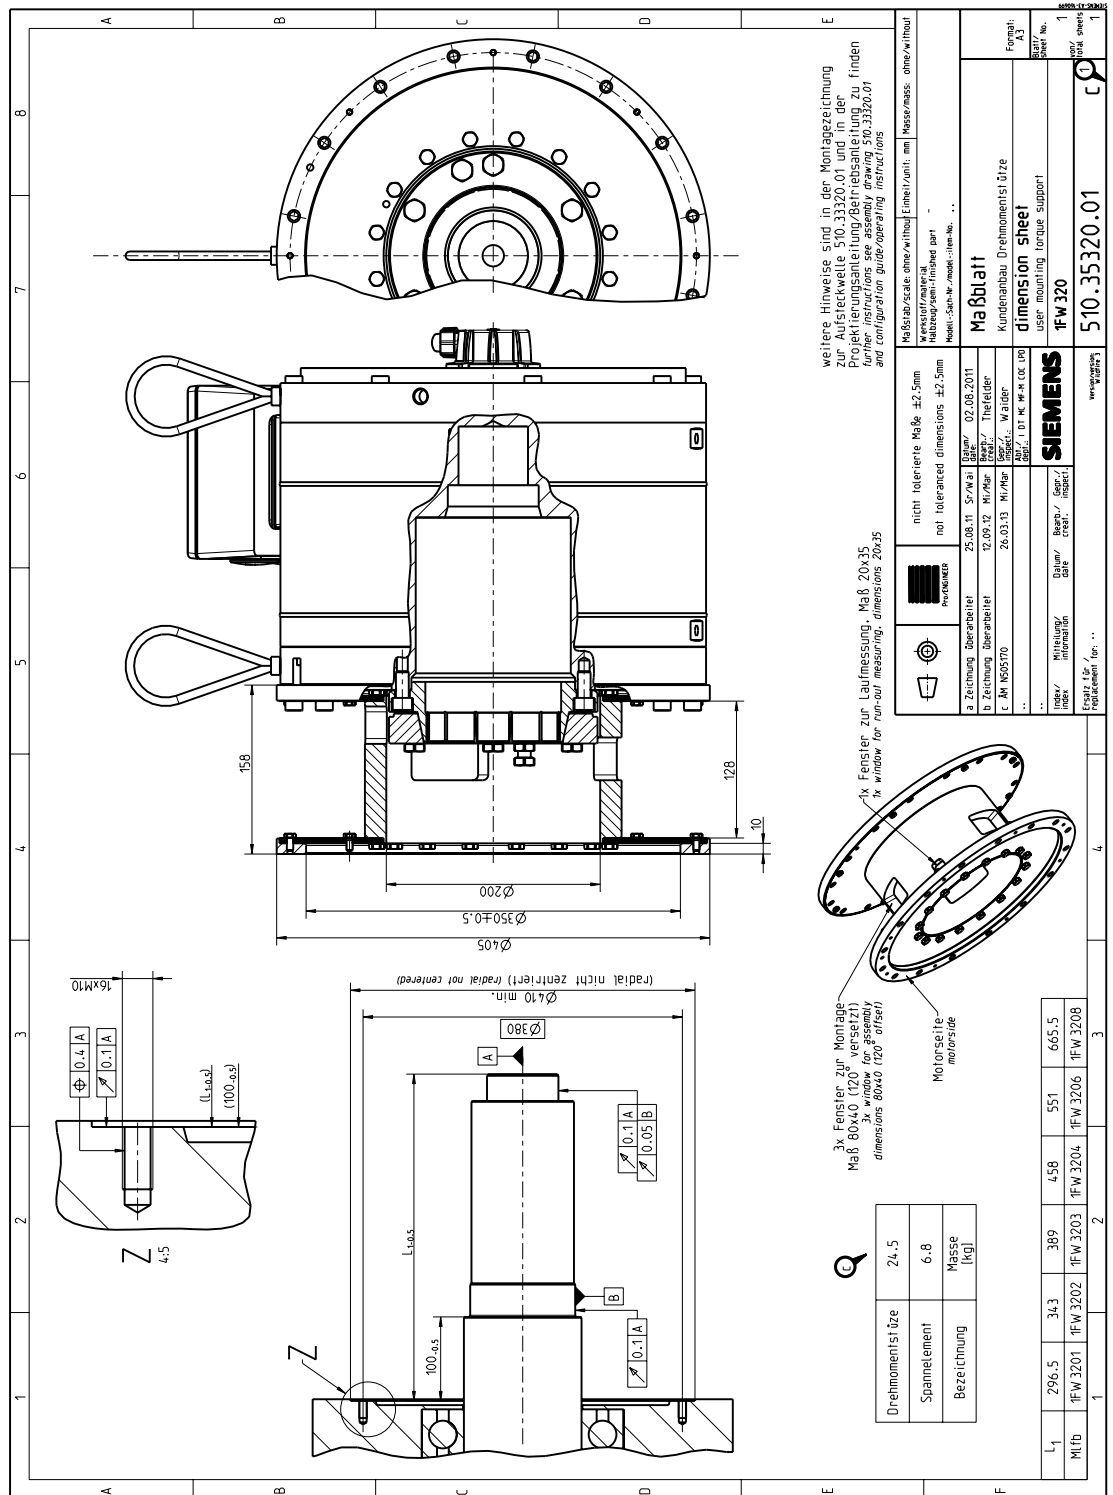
1FW320 Siemens torque arm, dimension drawing 510.35320.01
